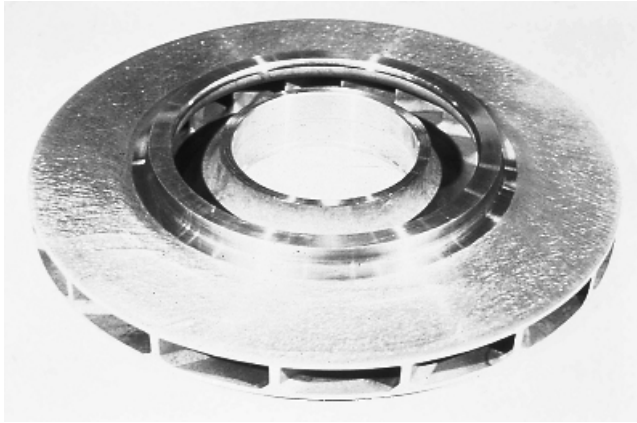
Two-piece welded impeller. (*Dresser-Rand Company, Olean, N.Y.*)
